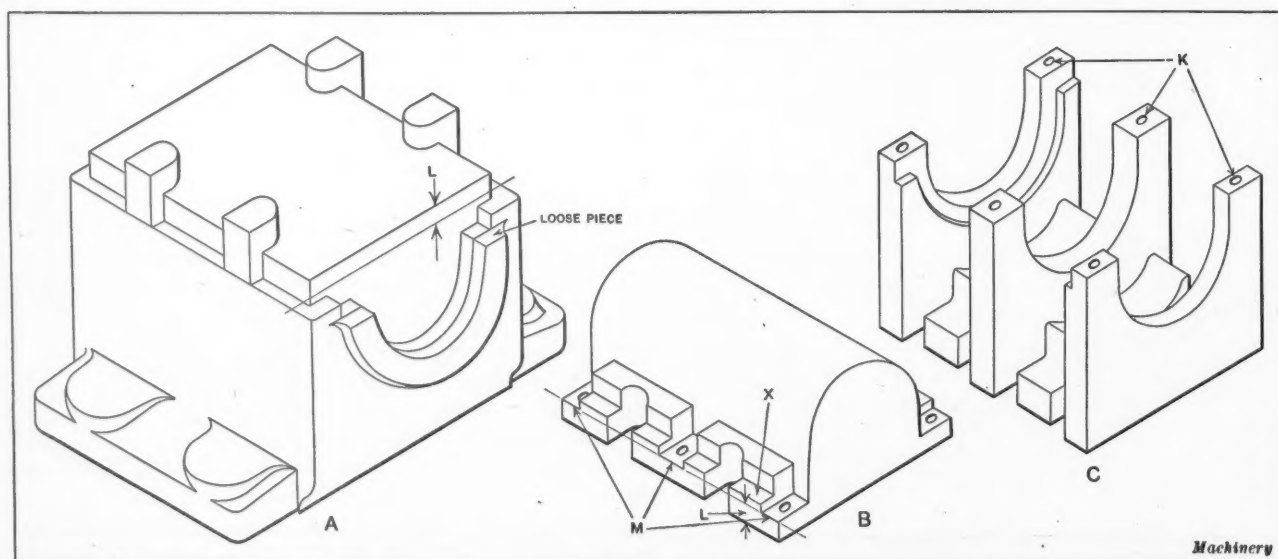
Pattern and Core-boxes used in molding a Self-oiling Pillow-block Bearing
